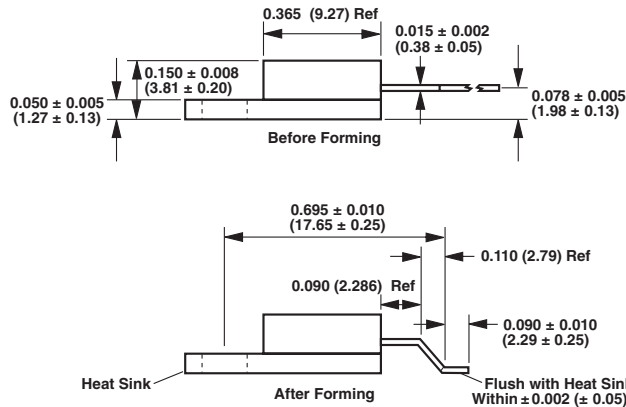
VPR220S DIMENSIONS in inches (millimeters)
